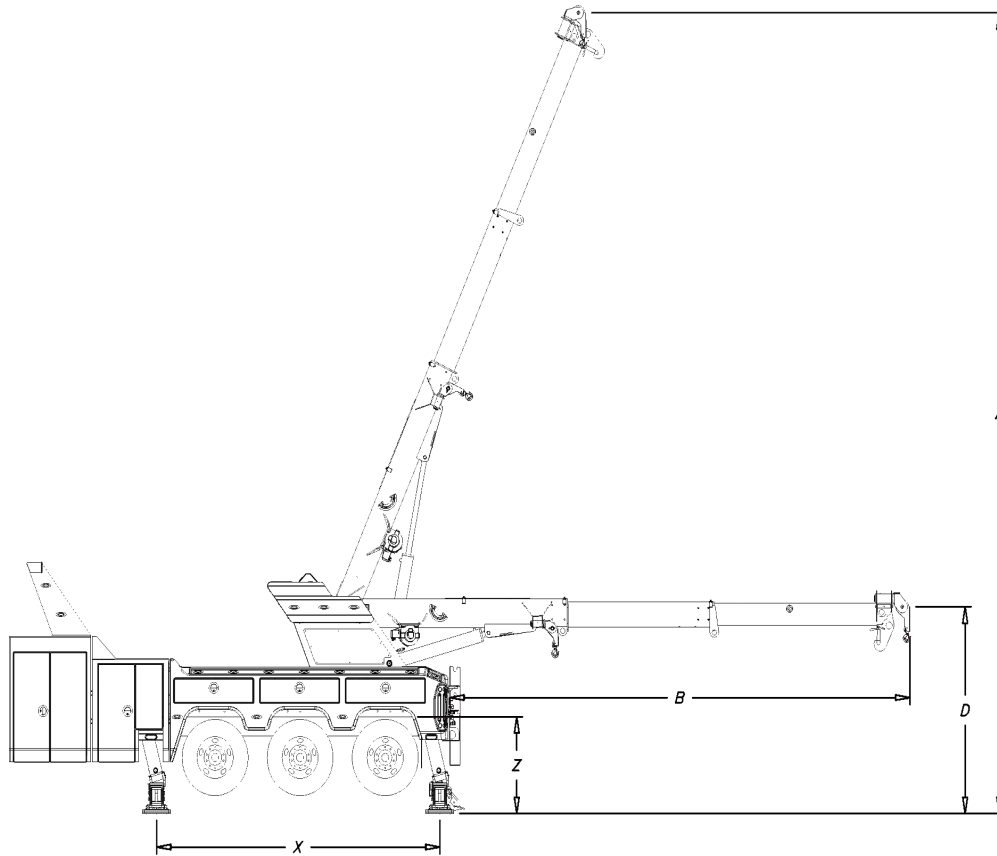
Dimensions of the Boom and Outriggers—Side View
